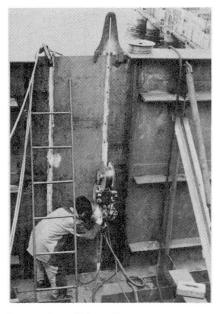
Single-arc ra- E illess device for welding ver-tical joints in metal 10...20 mm thick.
